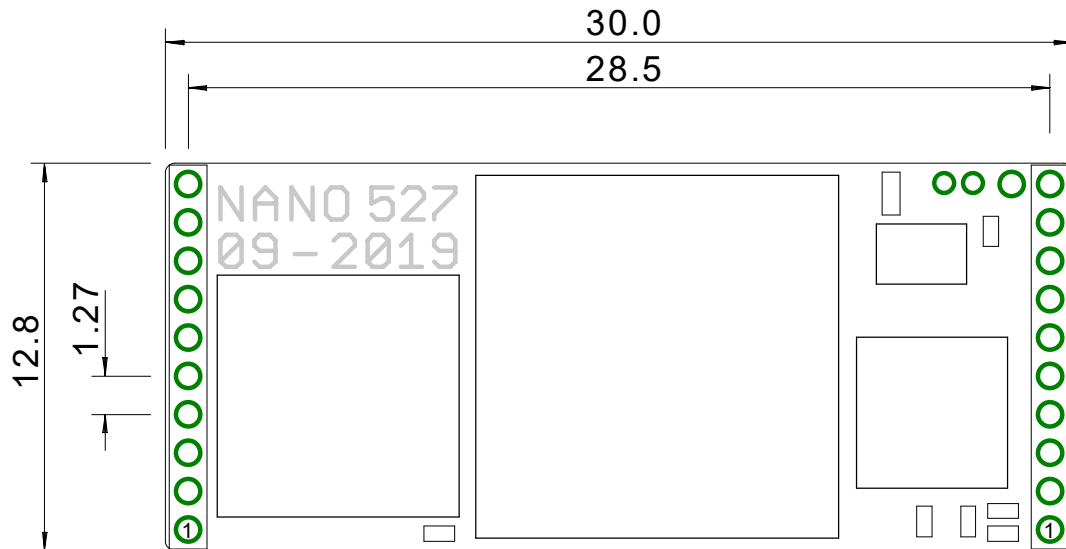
Outline Dimensions (Top View, all Dimensions are in Millimeters)
